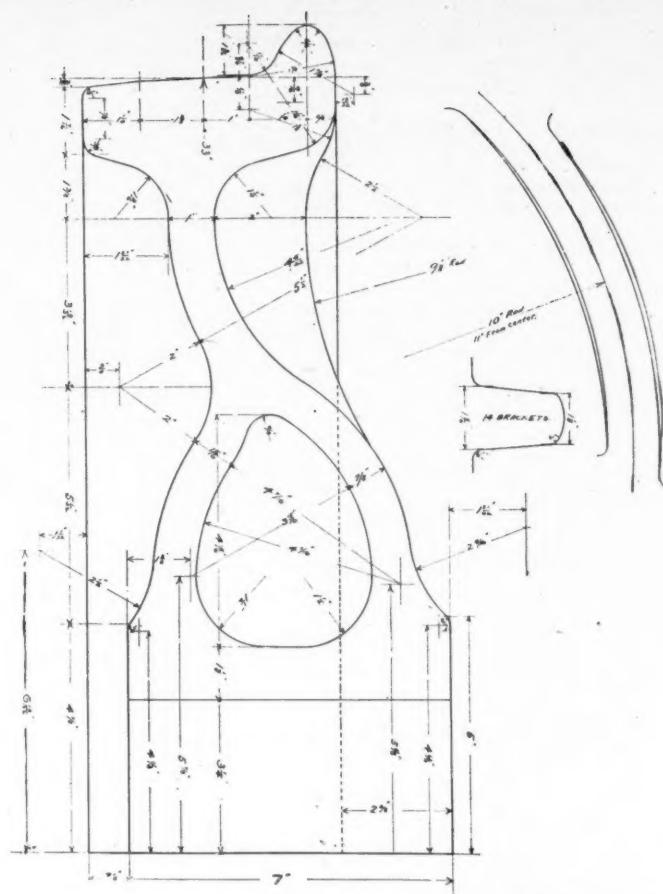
33 IN. 650-LB. CAST IRON WHEEL FOR 80,000-LB. CARS.
